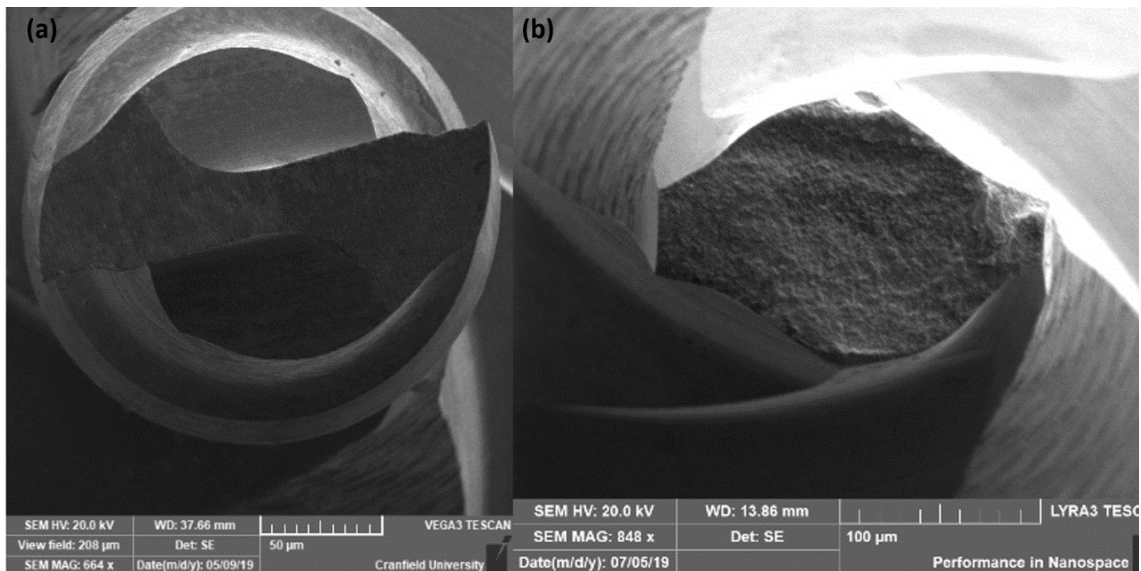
SEM image of HLS 1 (a) before (b) after machining.
